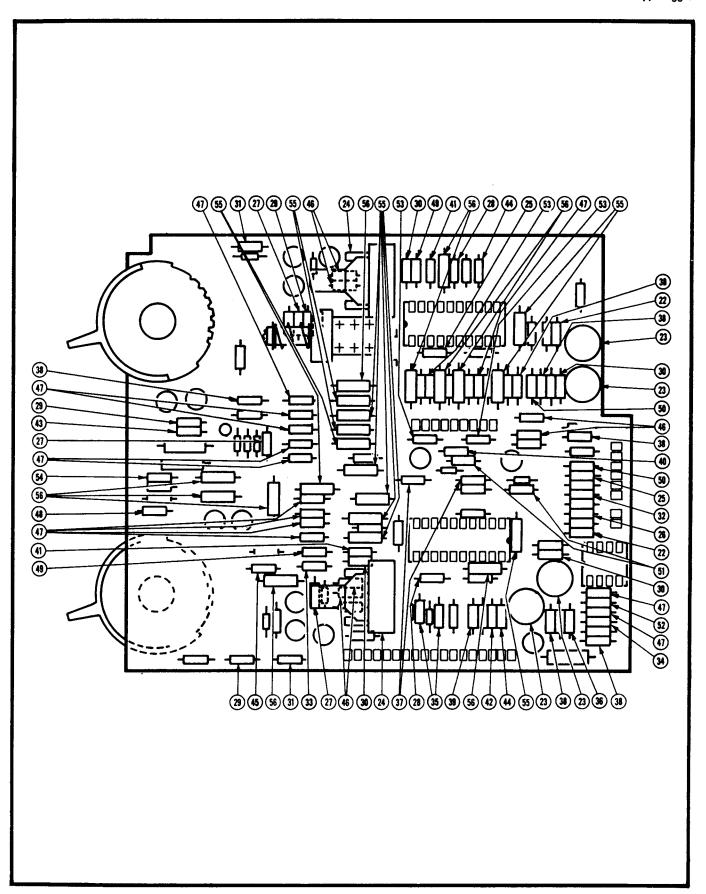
Circuit Board Assembly, Trigger (Sheet 1 of 3).
